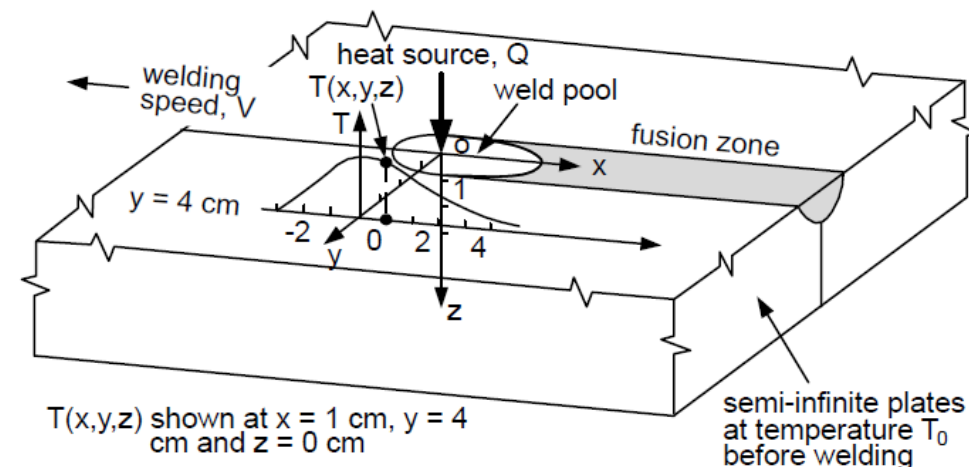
Three-dimensional heat flow during welding of semi-infinite workpiece.
